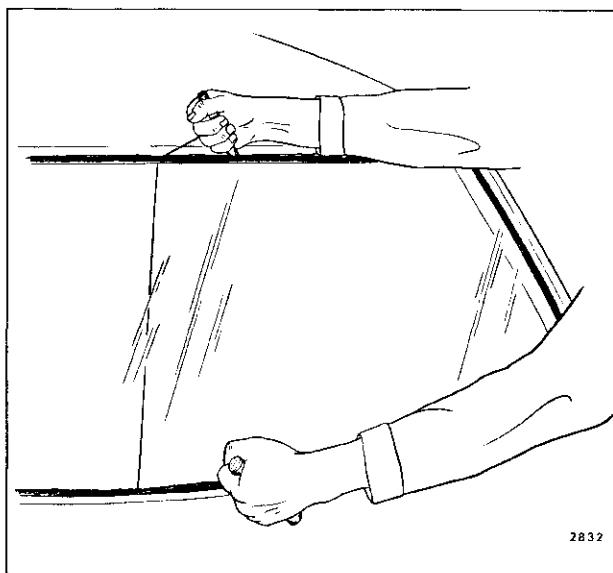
Adhesive Caulked Glass Removal - One-Man Wire Method
